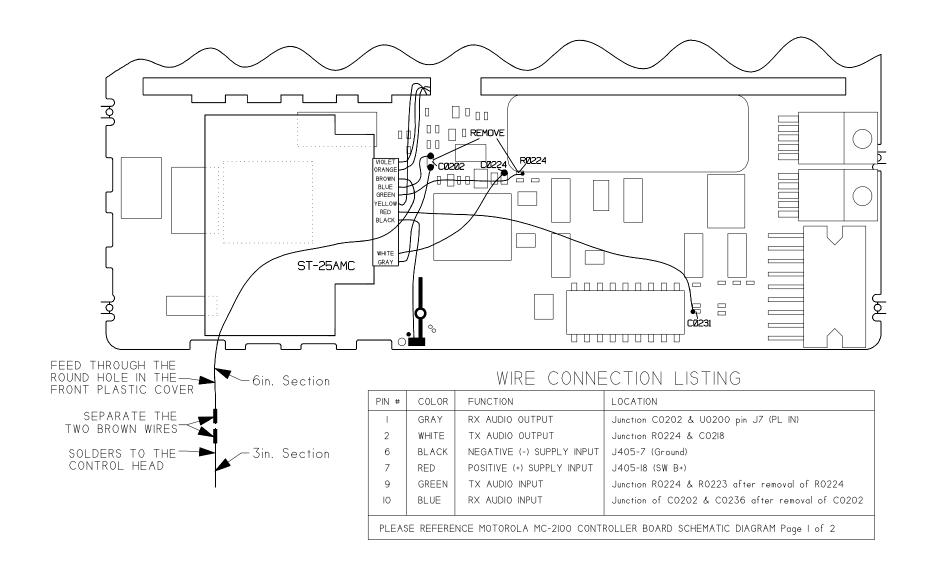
Motorola MC-2100 Main Board (Side 1)
